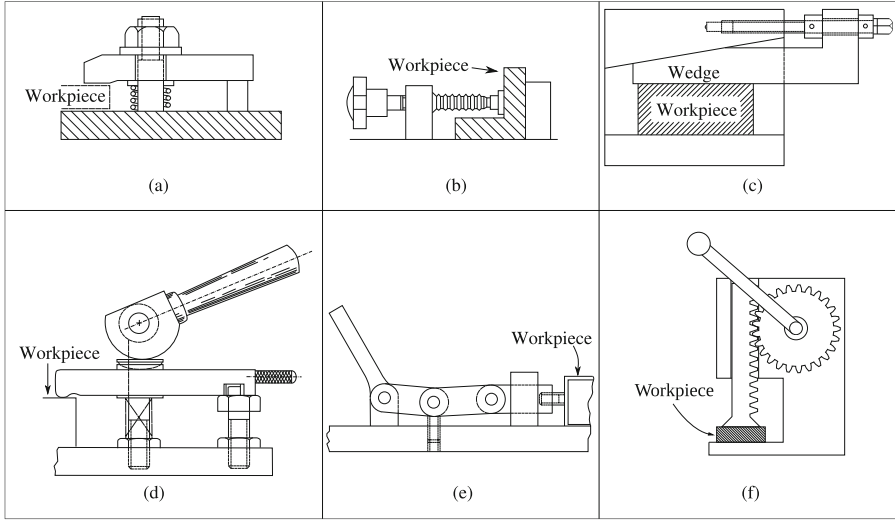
Types of clamping devices: (a) strap, (b) screw, (c) wedge, (d) cam, (e) toggle, (f) rack-and-pinion. Adapted from [4].
